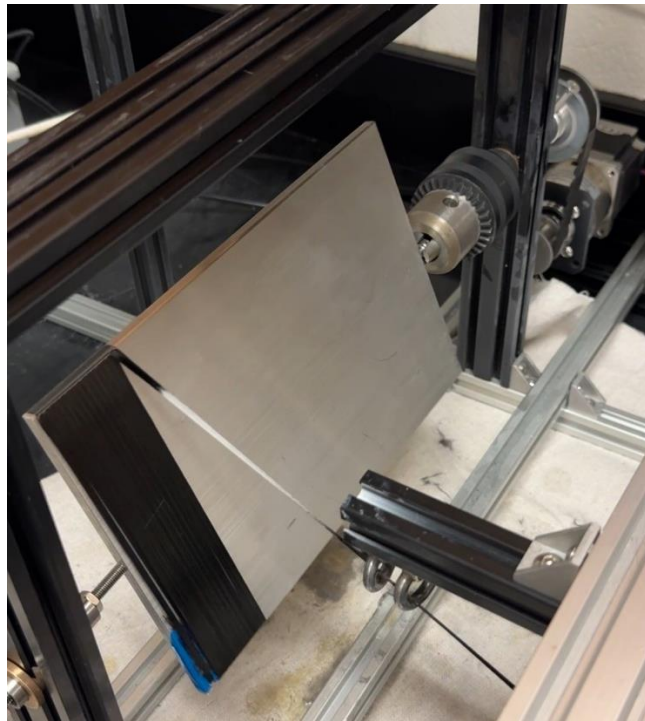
Paddle shaped mandrel for mechanical testing samples.
